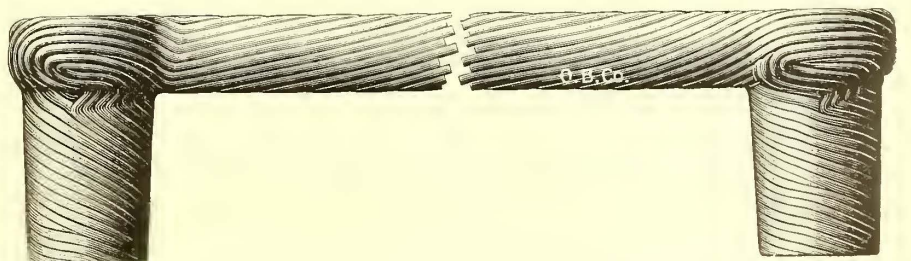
CABLE, COLD PRESSED, READY FOR WELDING
